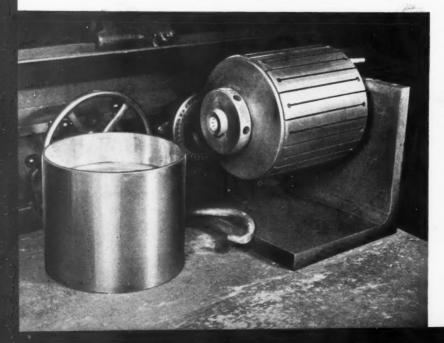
Babbitt is spun into bearing shells in special lathes after treating the bearings by the Kolene process.
